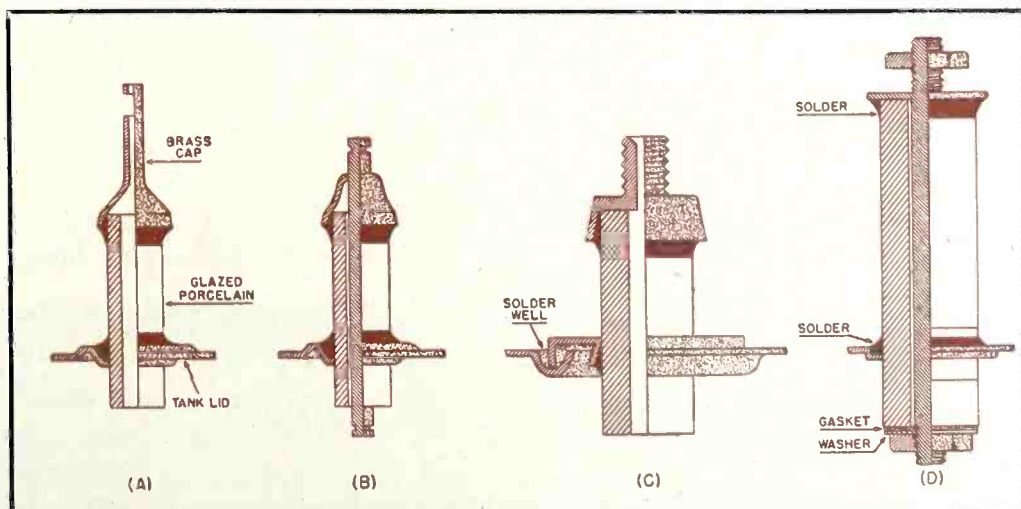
Detailed construction of solder-seal ceramic and glass bushings.
